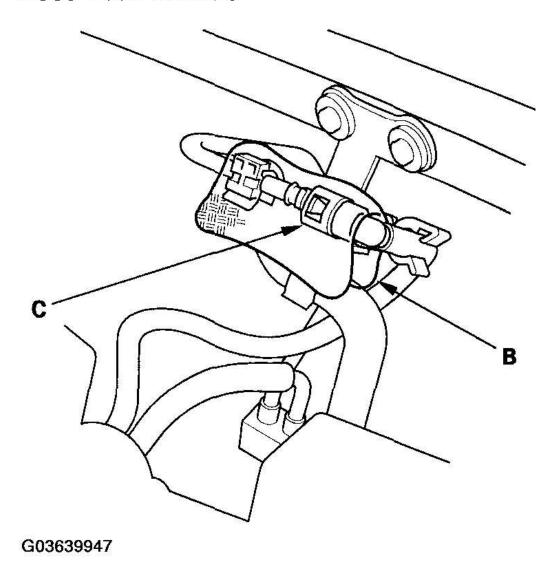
Removing Quick-Connect Fitting Cover (2005-06 Models) Courtesy of AMERICAN HONDA MOTOR CO., INC.
